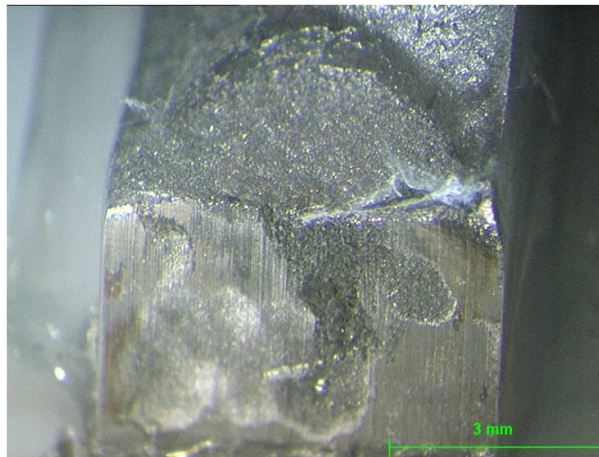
Crevice corrosion flaw having caused failure of the specimen
